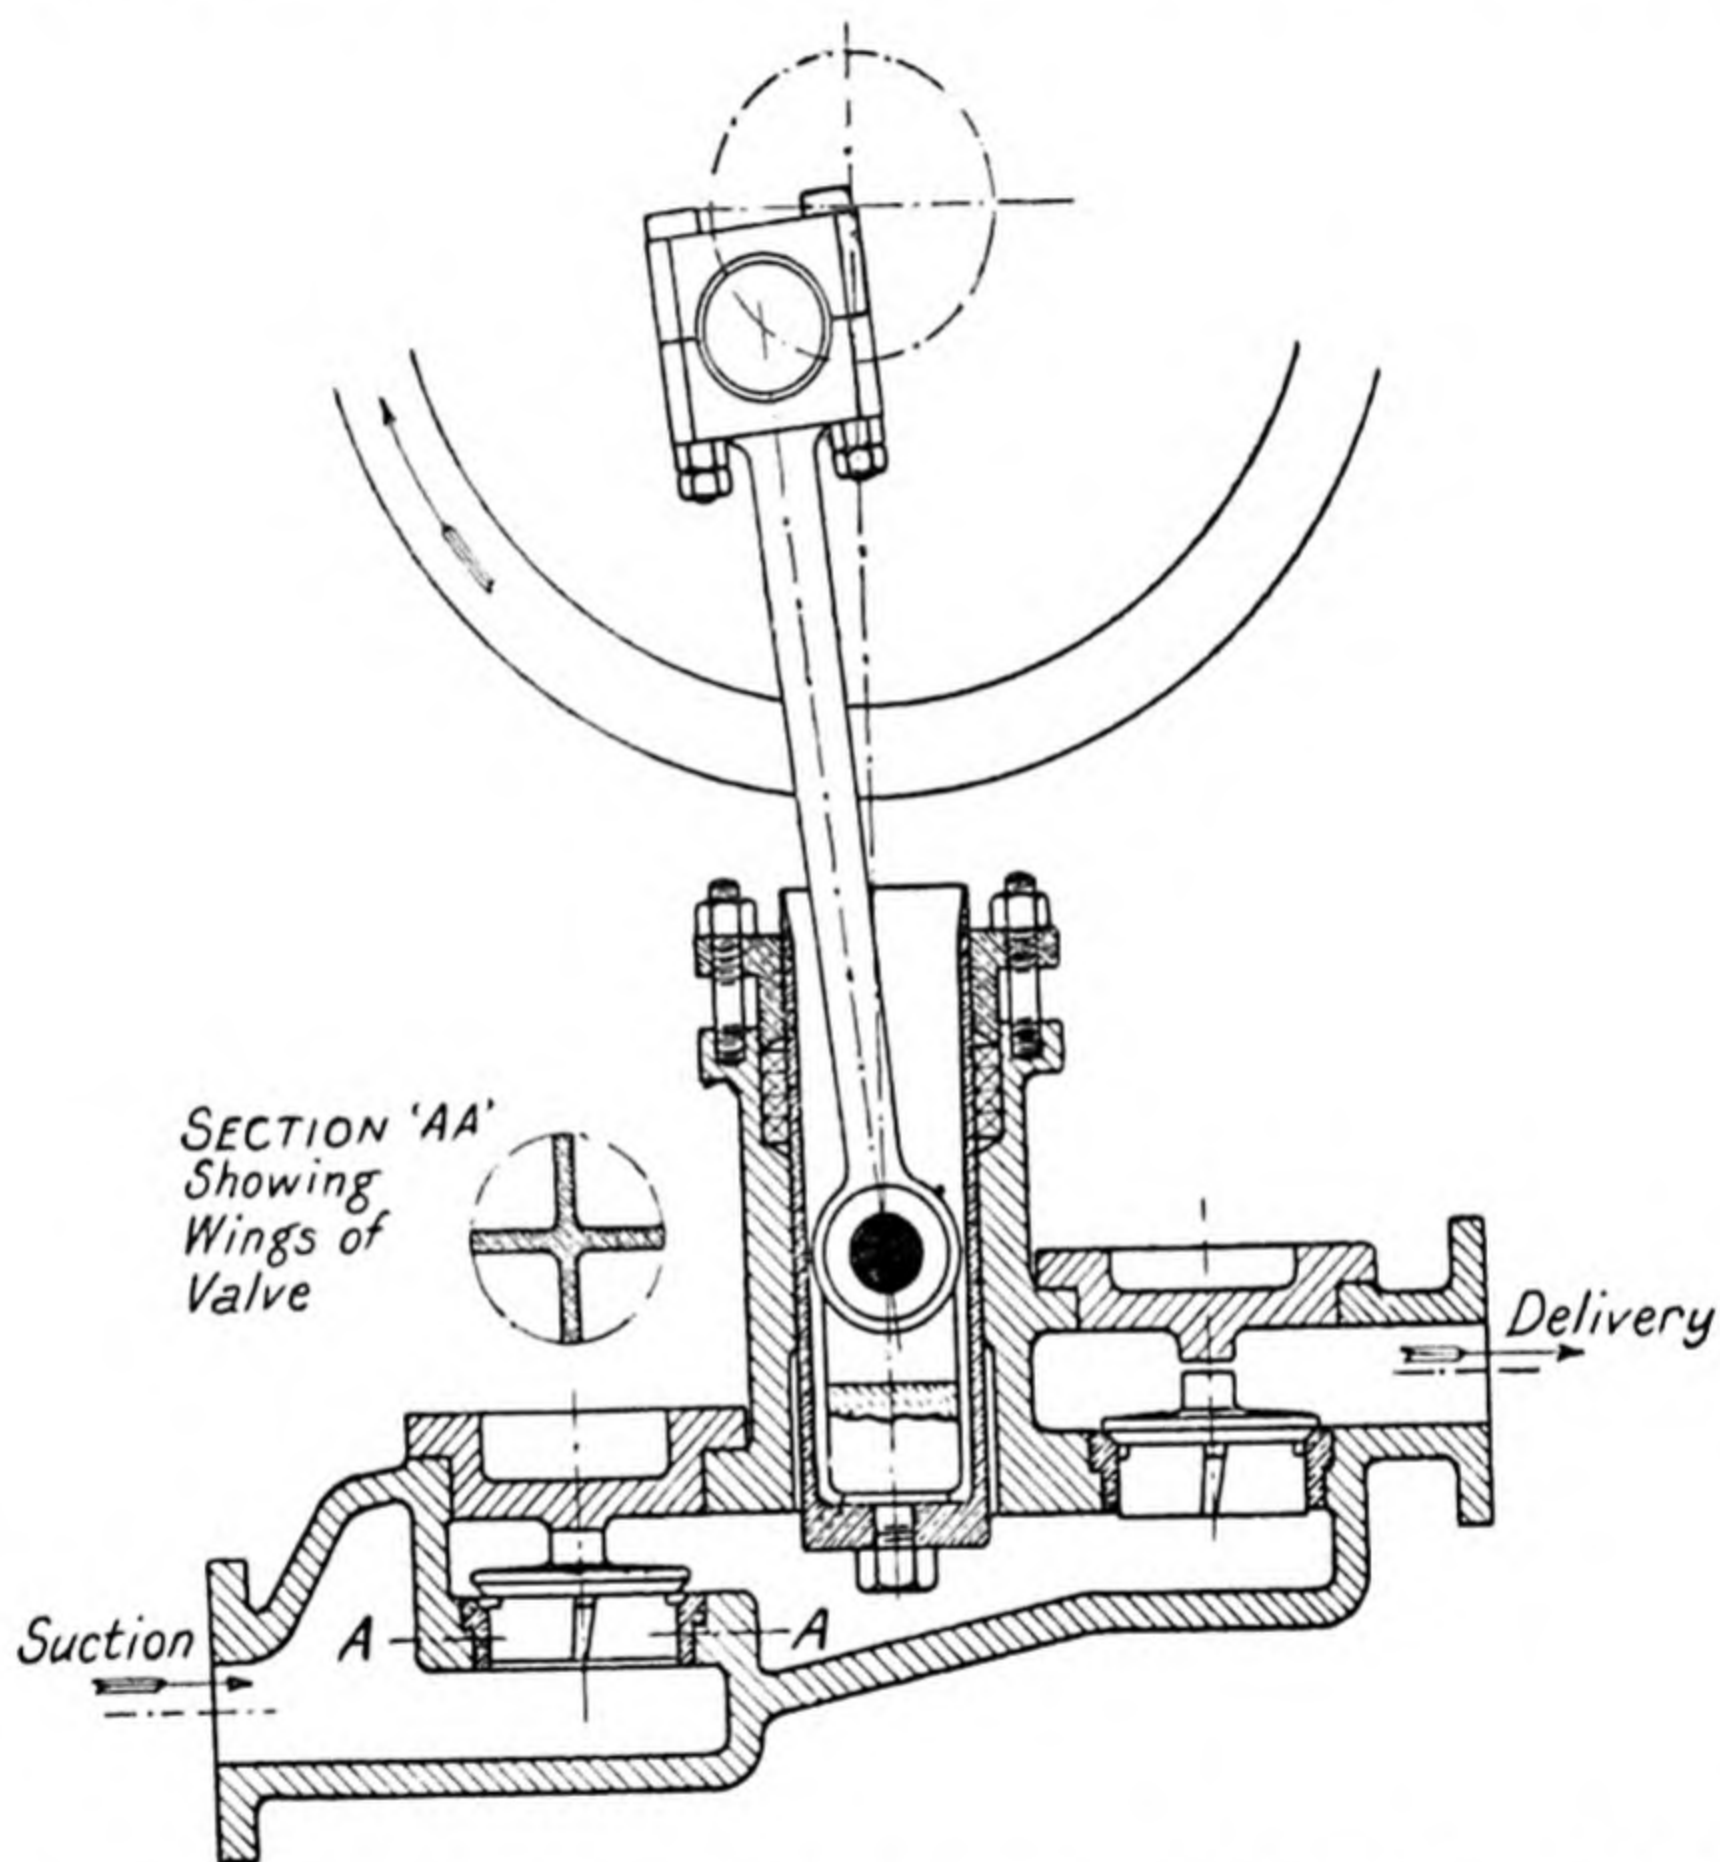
4 in. \times 6 in. single-acting ram pump. (F. W. Brackett & Co., Ltd.)
